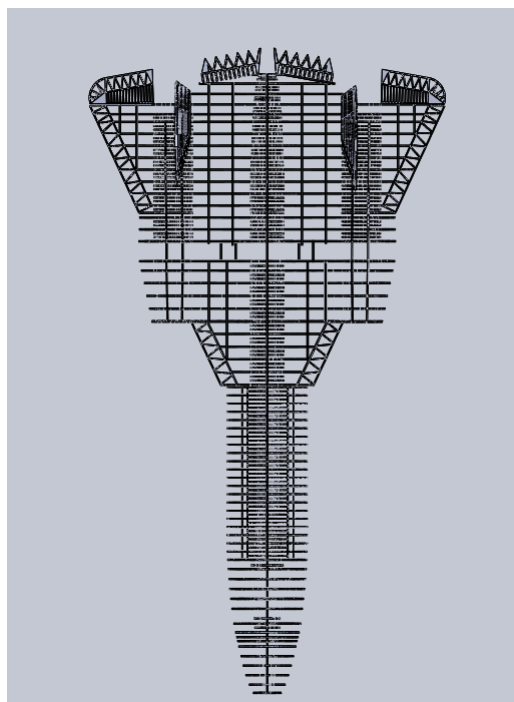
Full 3D CAD structure of the Lockheed SR-71 (top view)
